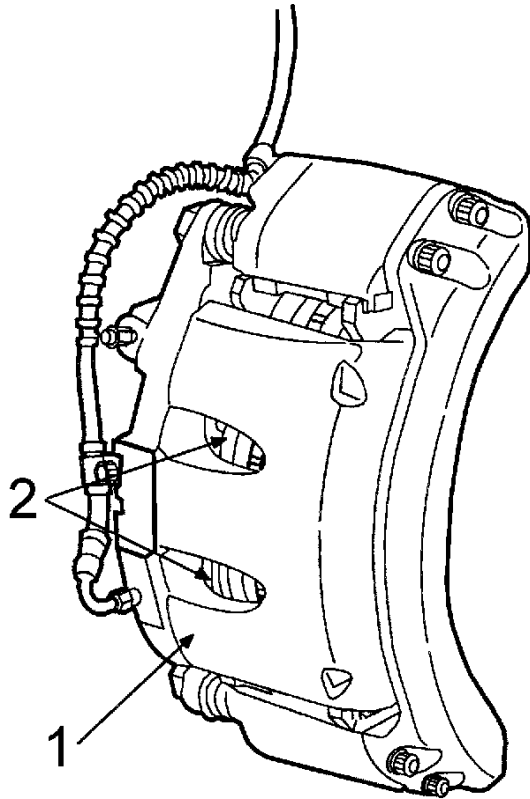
Hydraulic Pin Slide Disc Brake — Driver Side Front (73 mm)
